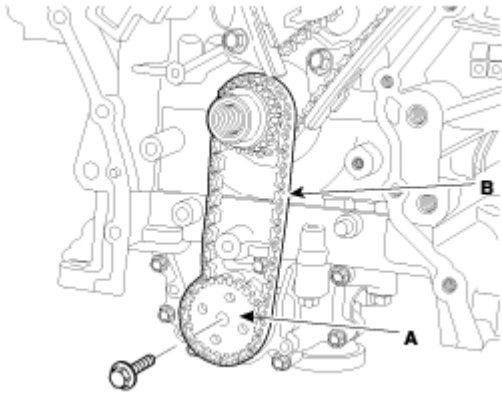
Identifying Oil Pump Chain Sprocket And Oil Pump Chain
